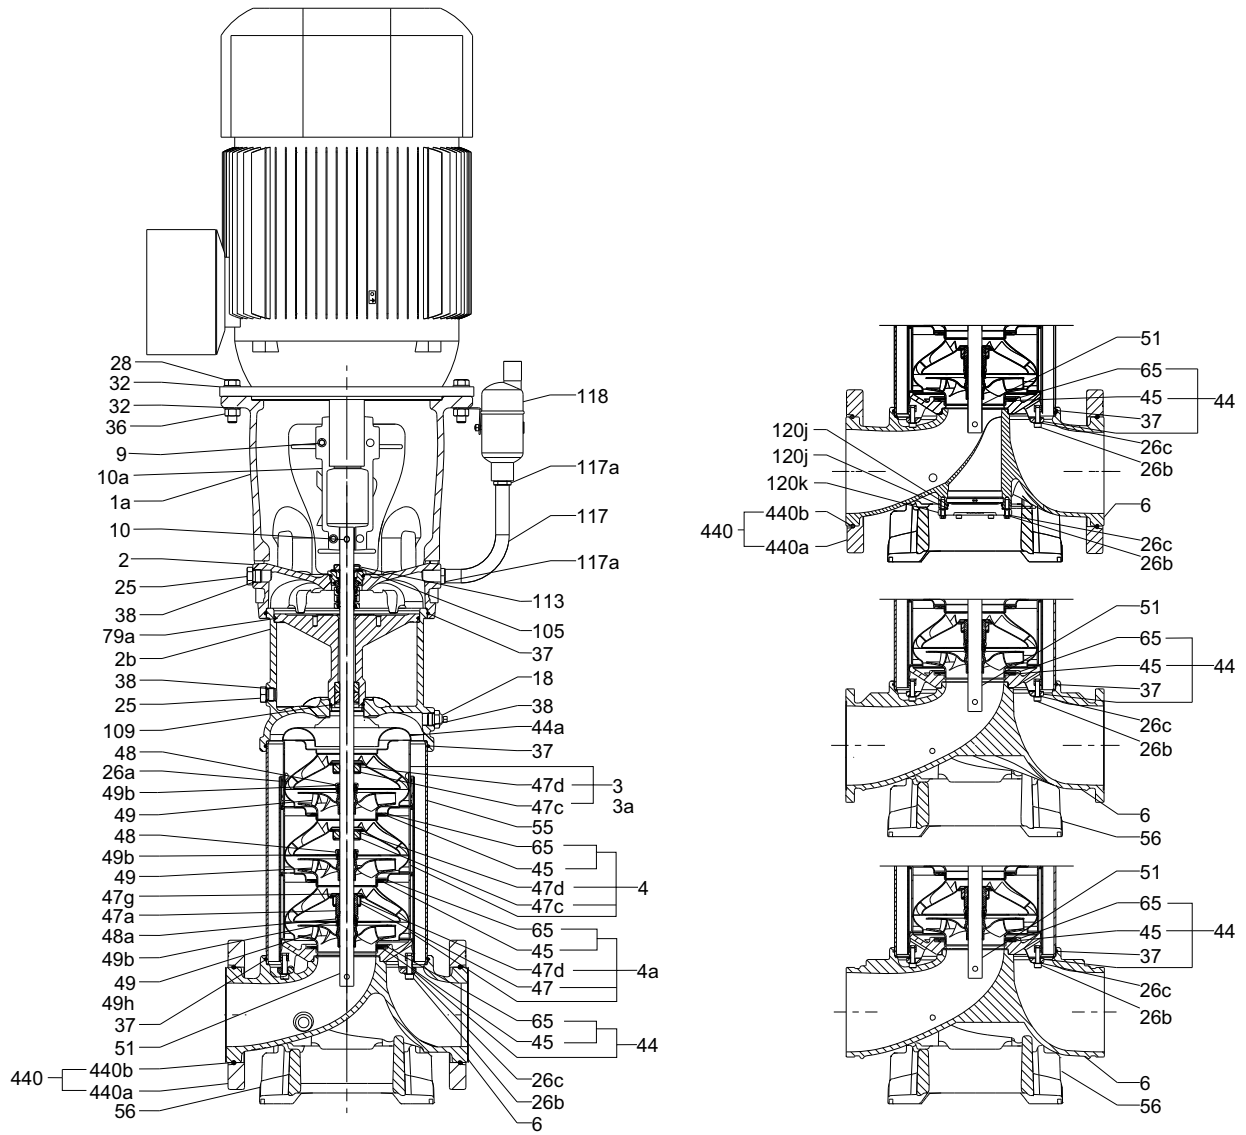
Sectional view of CR, CRN pump with air-cooled top
